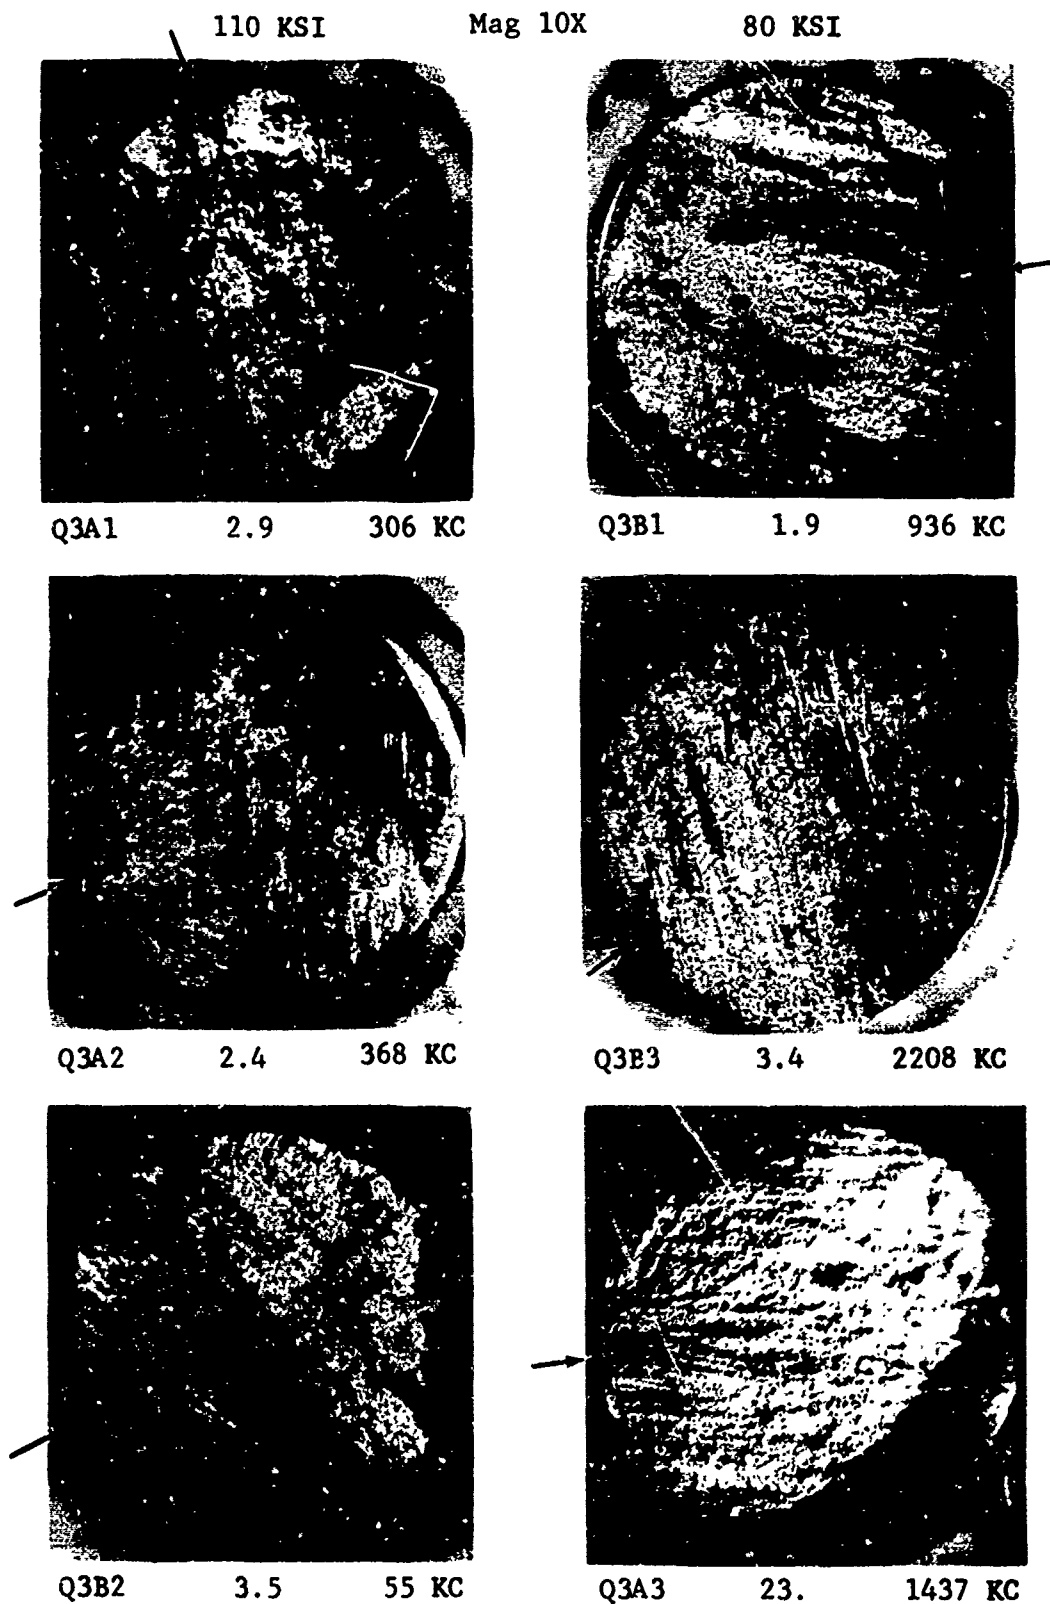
Fracture Surfaces of Failed Fatigue Specimens Series Q3-
